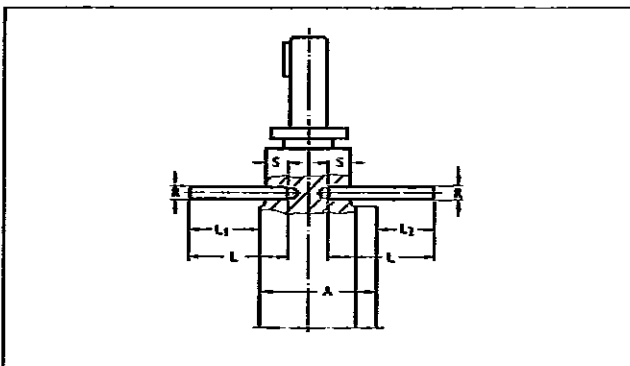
Stud bolt mounting dimensions, mounting options SB, BH
